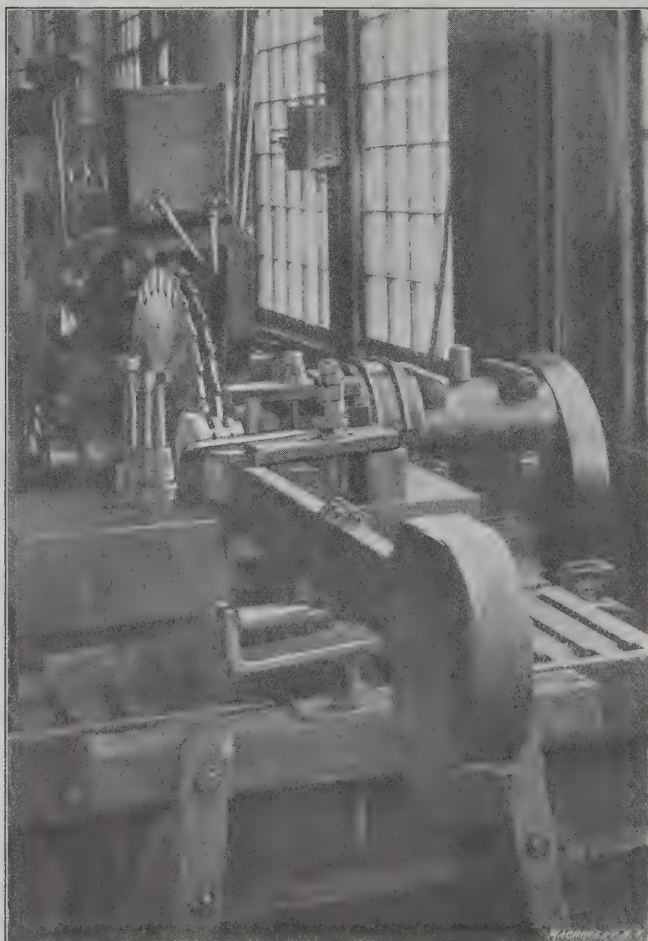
Cutting out the Knuckle-joint Slot in the End Rod
